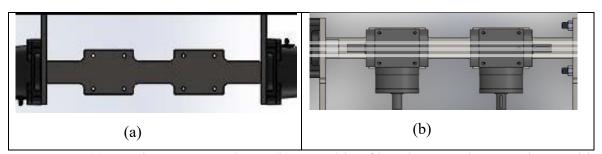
(a) Bevel gear support beam (b) assembly of bevel gear and support beam with base beam
